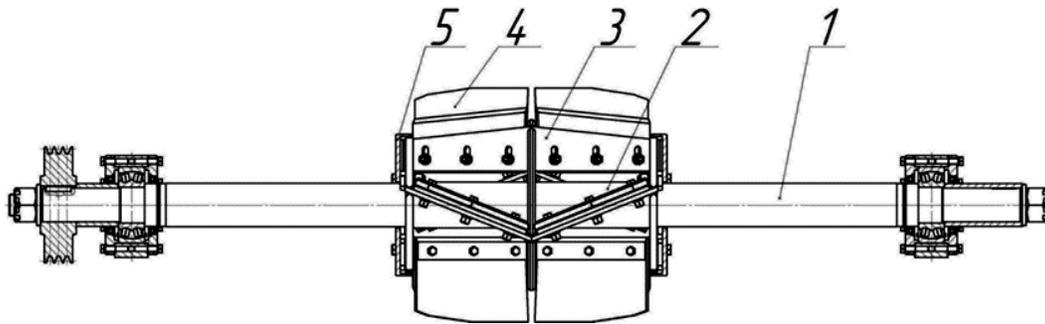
Blade rotor of mixer: (1) shaft; (2) drum; (3) removable blades; (4) flexible blade elements; (5) lock
